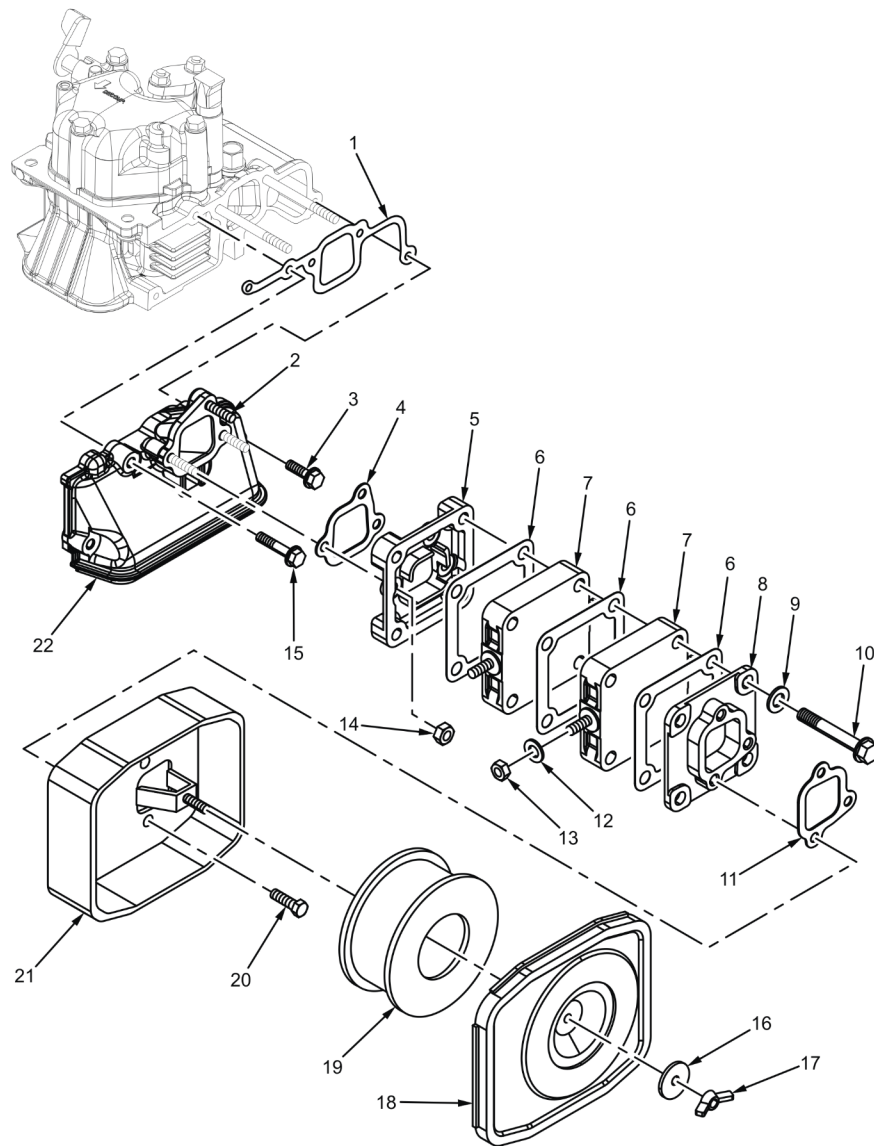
Air Cleaner Assembly L70AE-DEGFR.
